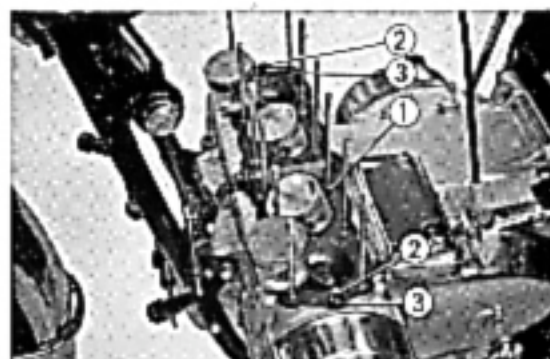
(1) Cylinder gasket (2) Dowel pins (3) O-rings
